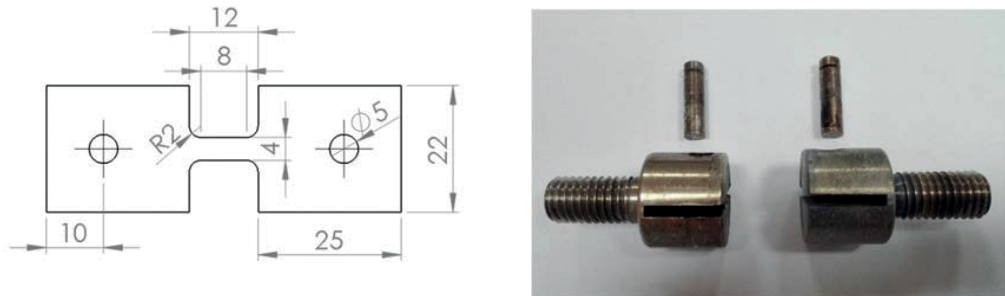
a. Ti6Al4V samples geometry, Madrid; b. Clamp designed to attach the specimens. All dimensions are in mm.
